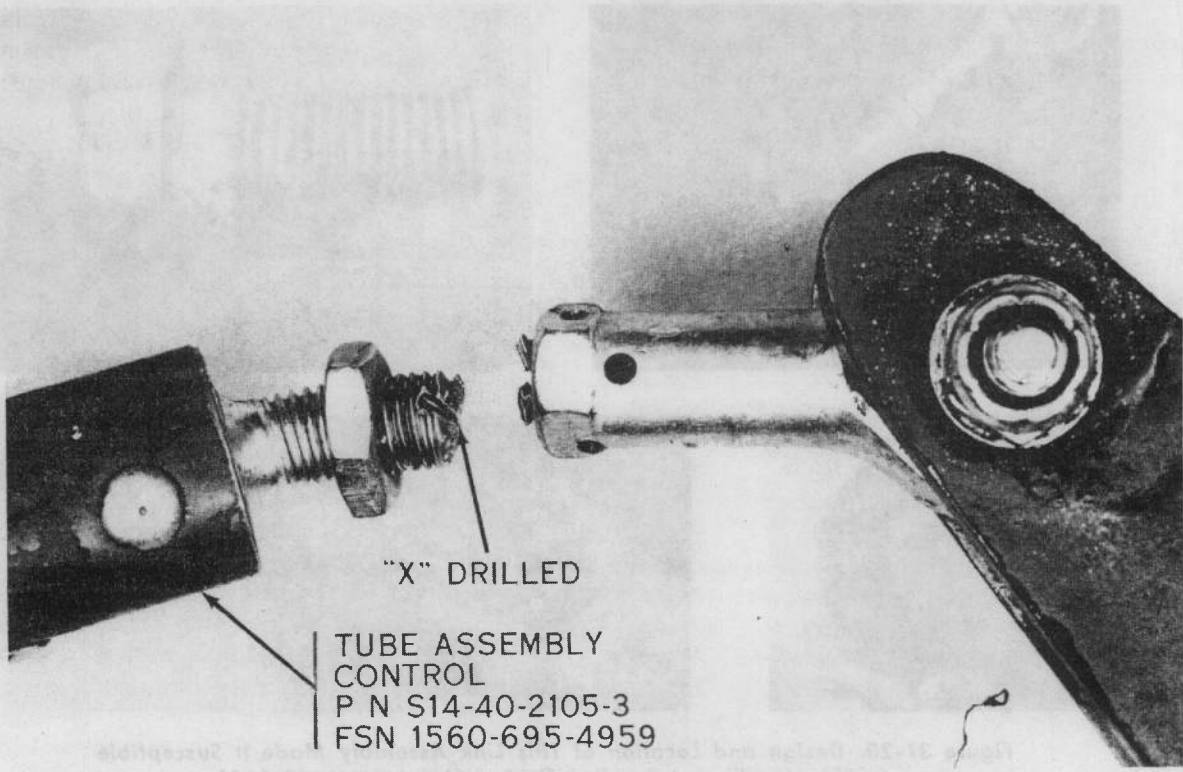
Drilled Hole Weakened Control Rod and Caused This Accident (Ref. 1)
